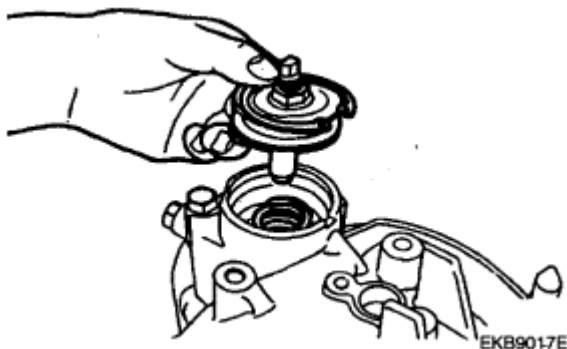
Identifying Reverse Clutch Piston And Reverse Clutch Retainer
